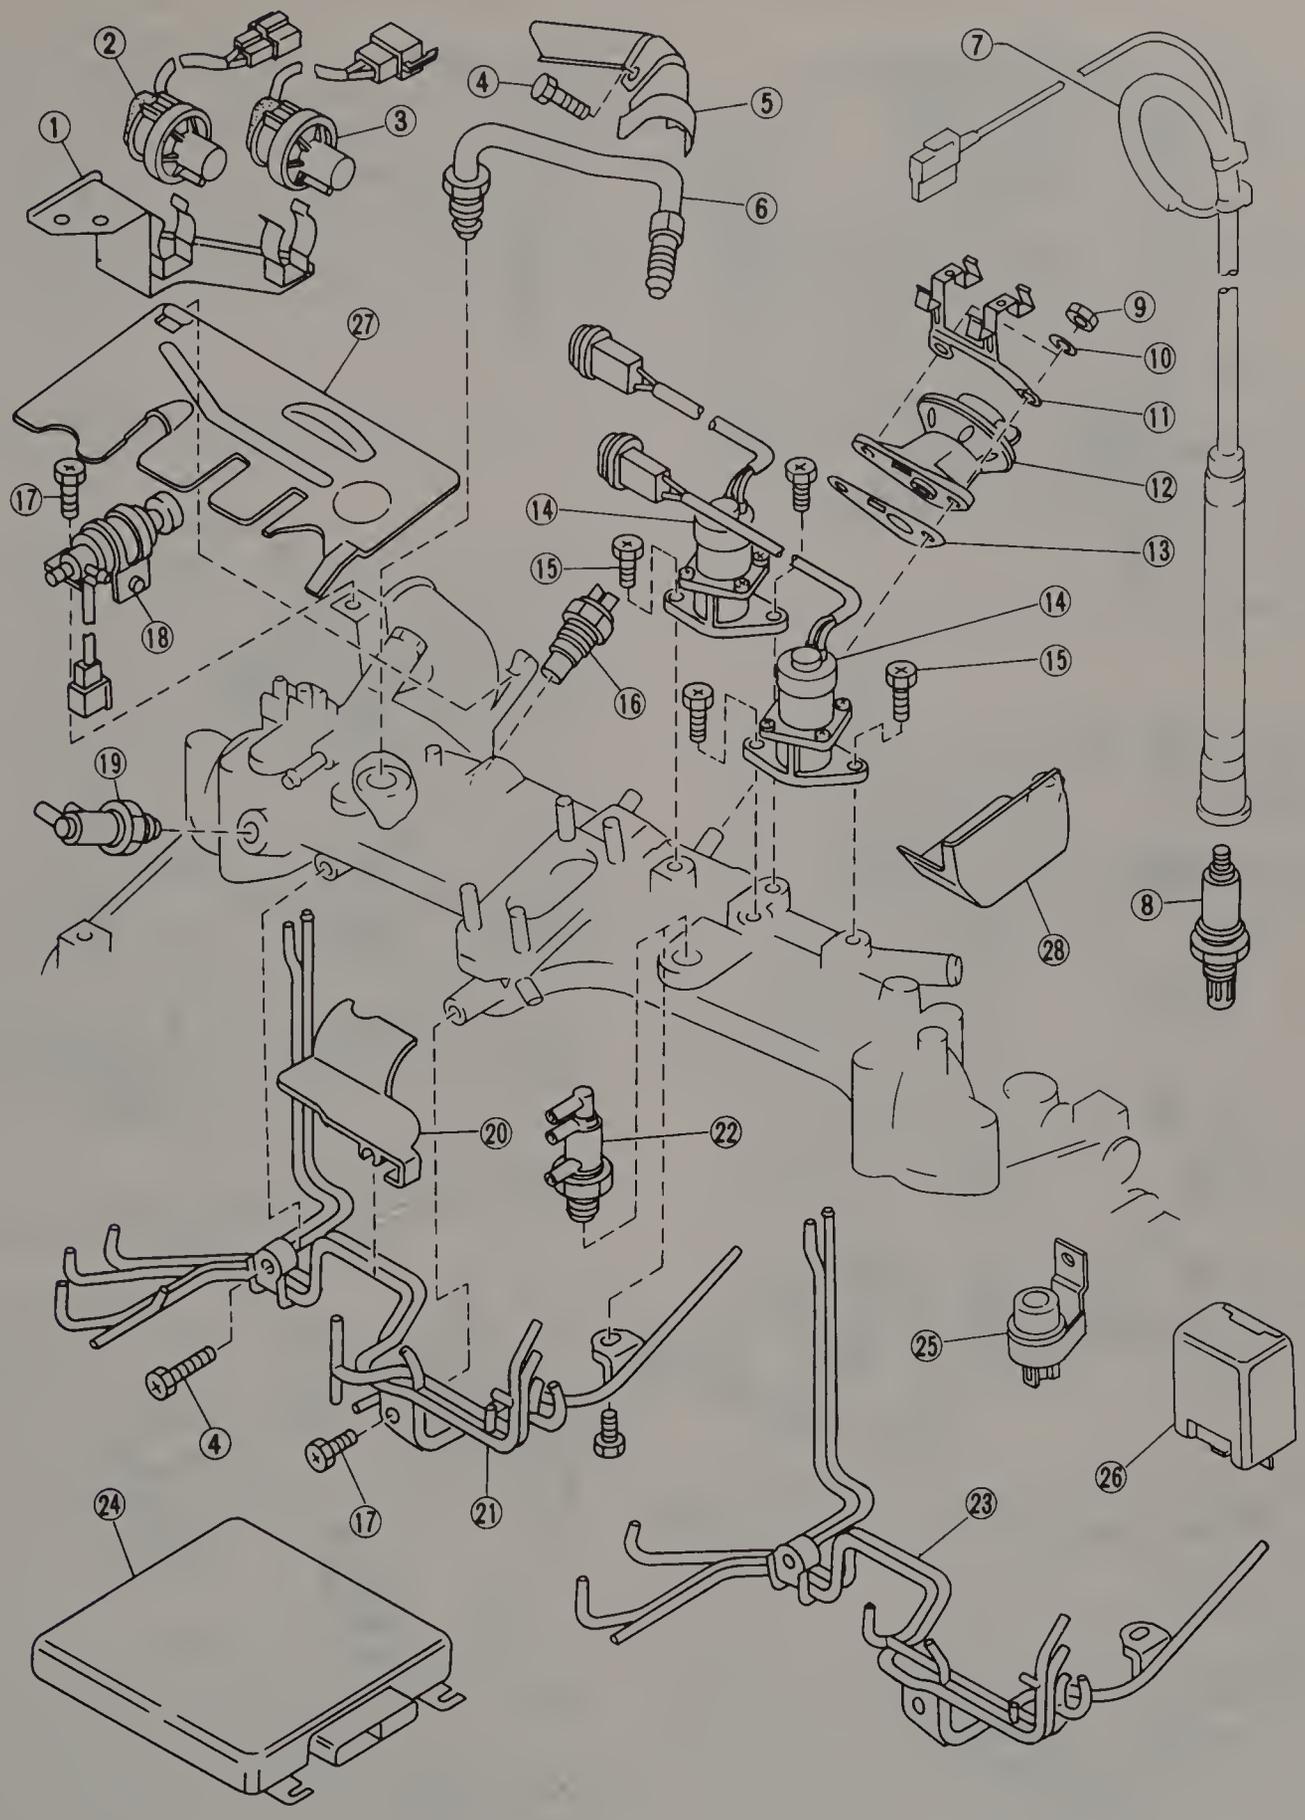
Emission control components for vehicles with Hitachi carburetors – exploded view (typical – 1983 shown)
